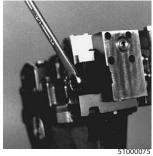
Remove E1-E2 or F1-F2 Control Solenoid Valve Solenoid
